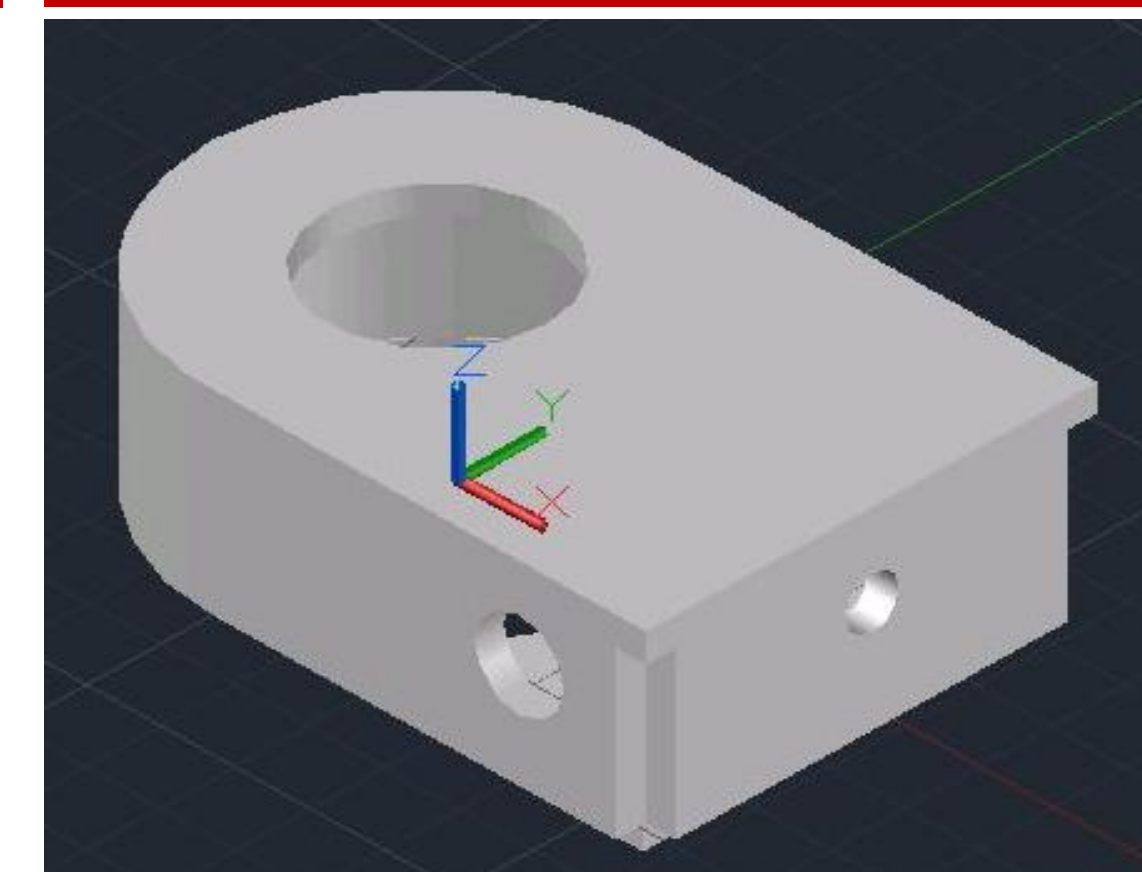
AutoCAD drawing of 1<sup>st</sup> prototype.
